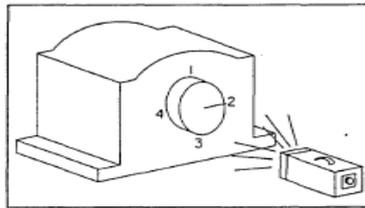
Four axial phase readings at each bearing are needed to see how each bearing is vibrating axially.
